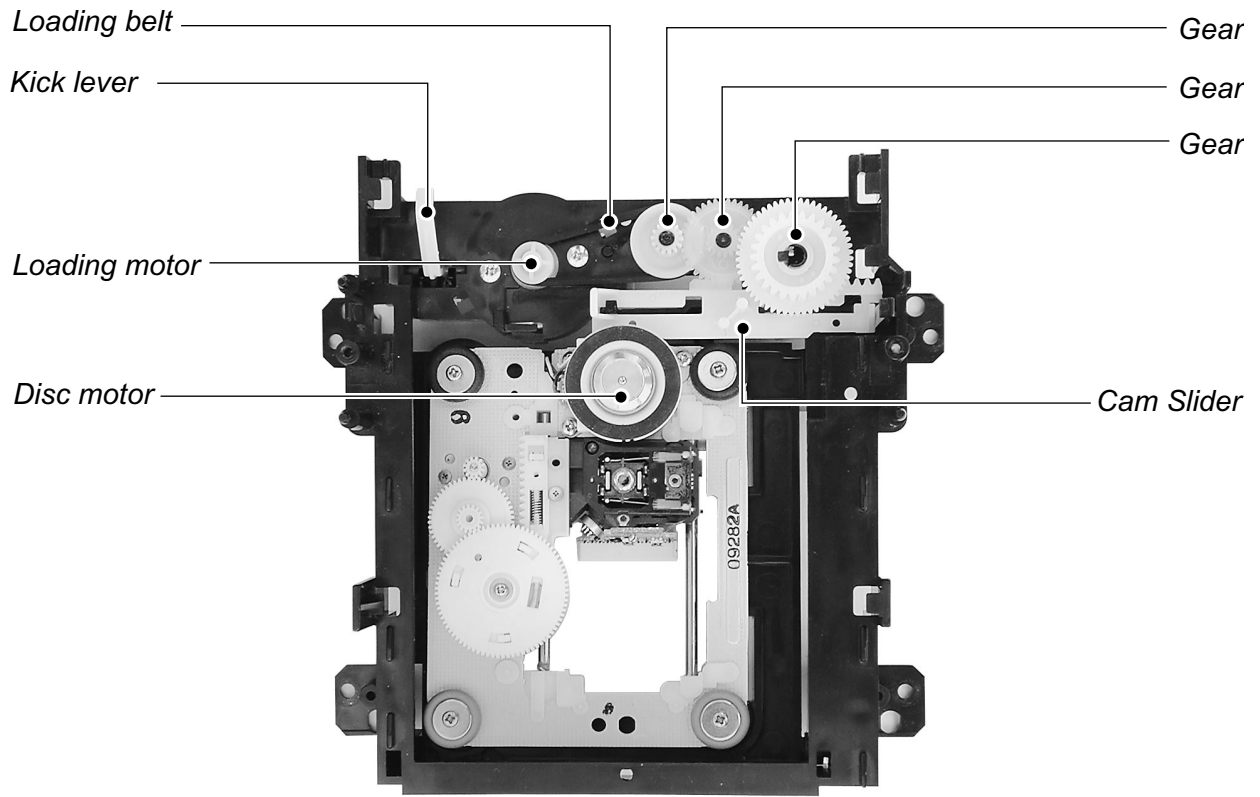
Mechanism chassis assembly (Bottom side)
